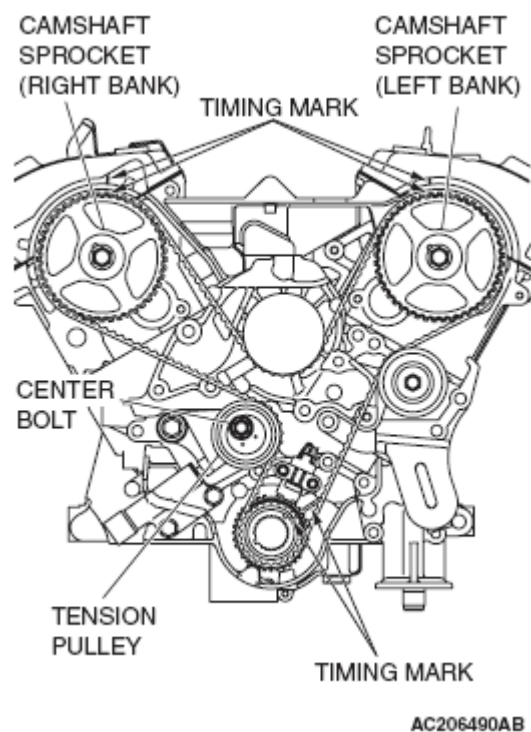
Identifying Timing Marks On Timing Belt And Camshaft Sprock
